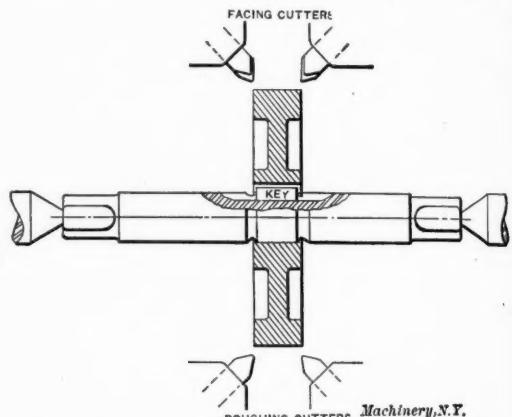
Facing Gear Blanks, mounted in the Lathe on a Keyed Arbor.
